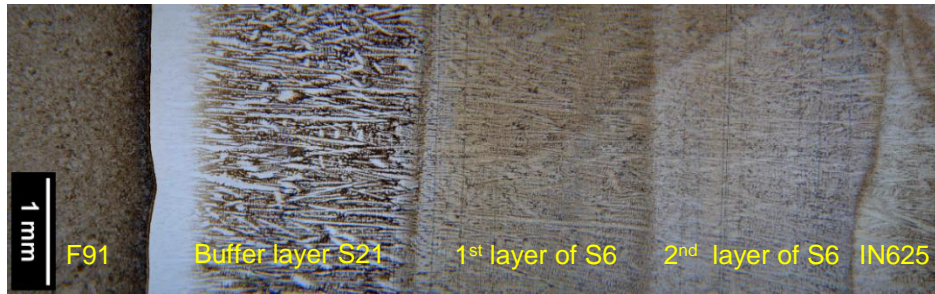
A montage of 5× optical images showing the cross-section of a hardfacing component: F91 base material, buffer layer S21, 1st and 2nd layers of S6, and filler material IN625.
